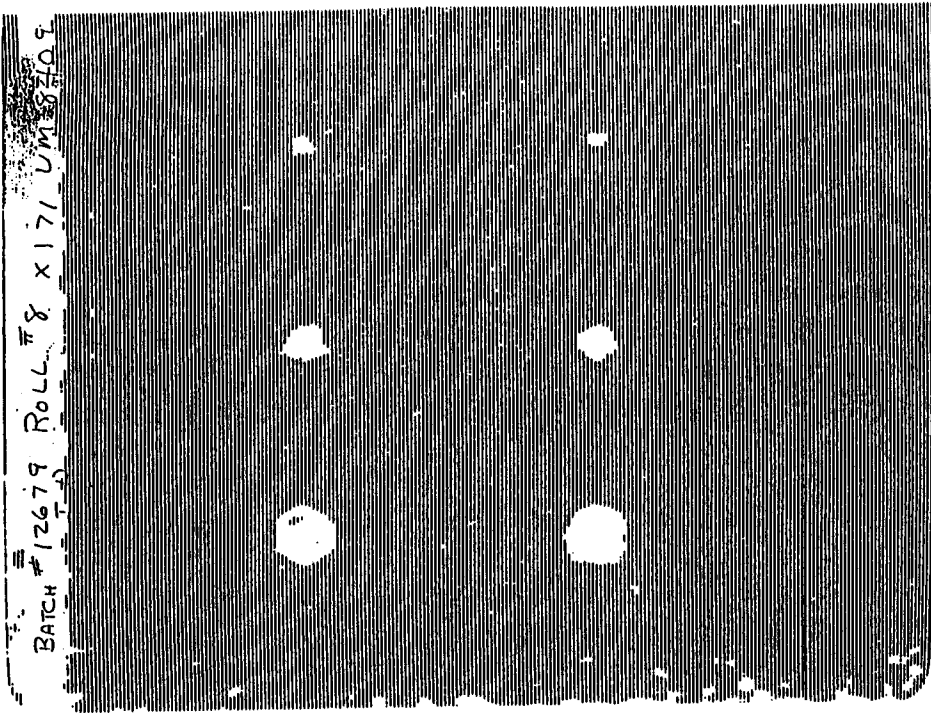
C-Scan Of Large Part, Using Several Transducers
